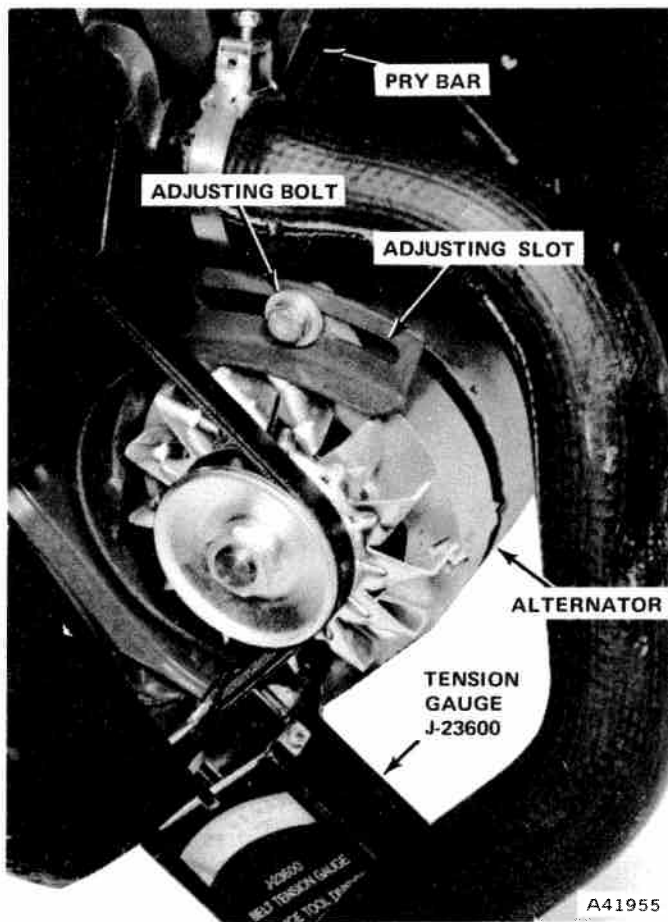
Adjusting Fan Drive Belt - Six-Cylinder
